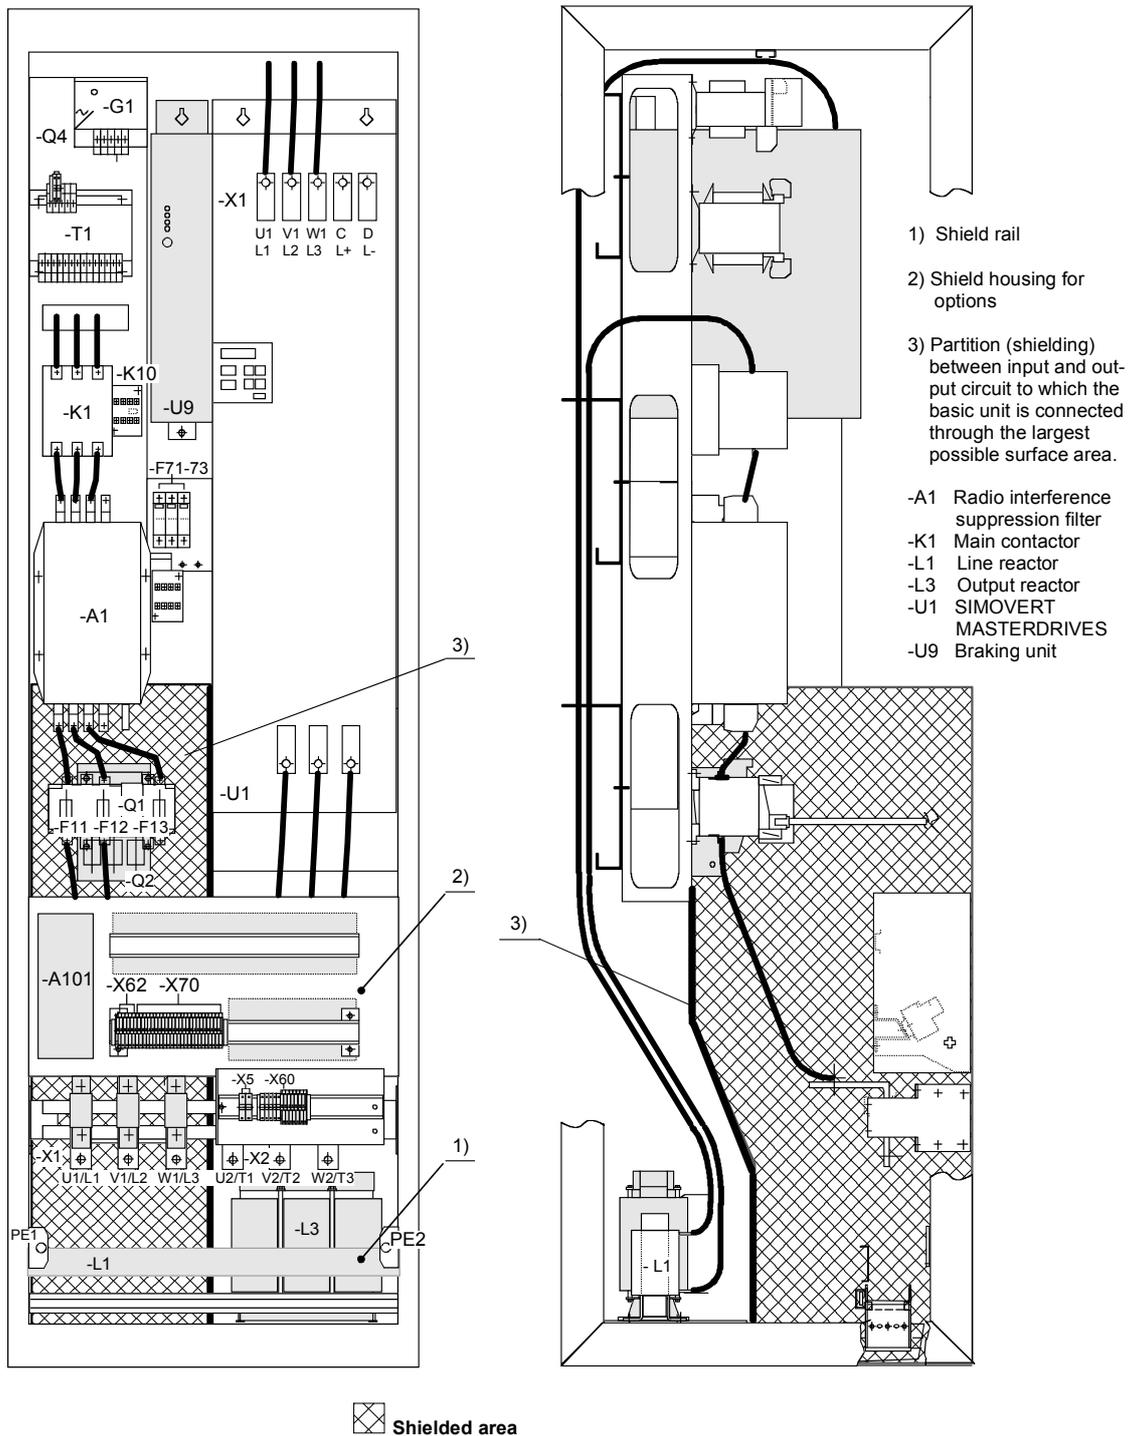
Example of a chassis unit mounted in the cabinet with radio interference suppression filter and line reactor
